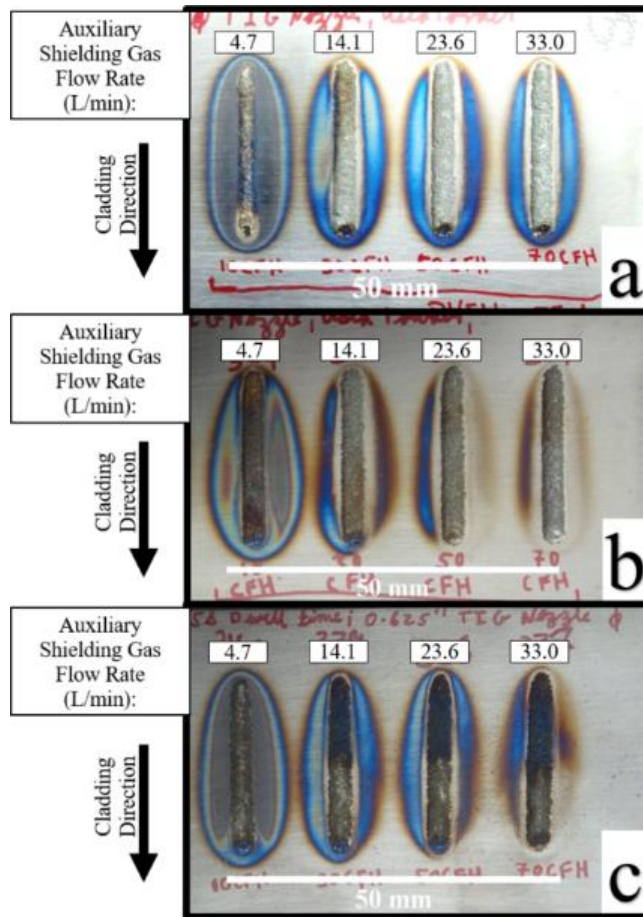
Effect of auxiliary shielding gas nozzle inner diameter and shielding gas flow rate on clad appearance. a: Diameter =28.6 mm; b: Diameter = 15.9 mm; c: Diameter =9.53 mm. The parameters used were: Laser power = 800 W; Laser scan speed = 245 mm/min; Powder feed rate = 8.9 g/min; Powder condition = recycled; Auxiliary shielding gas nozzle type = TIG
